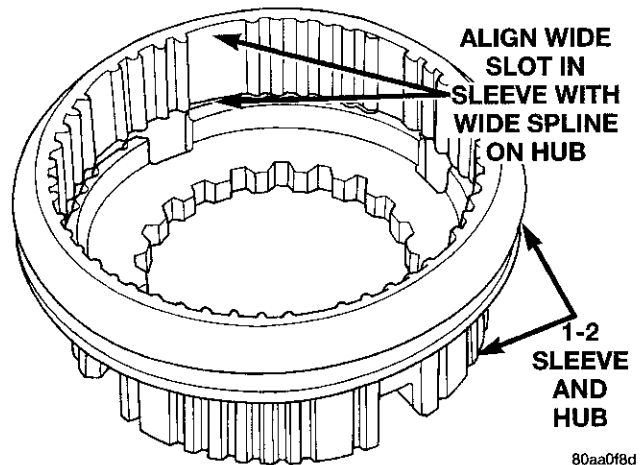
Installing 1-2 Synchro Sleeve On Hub
